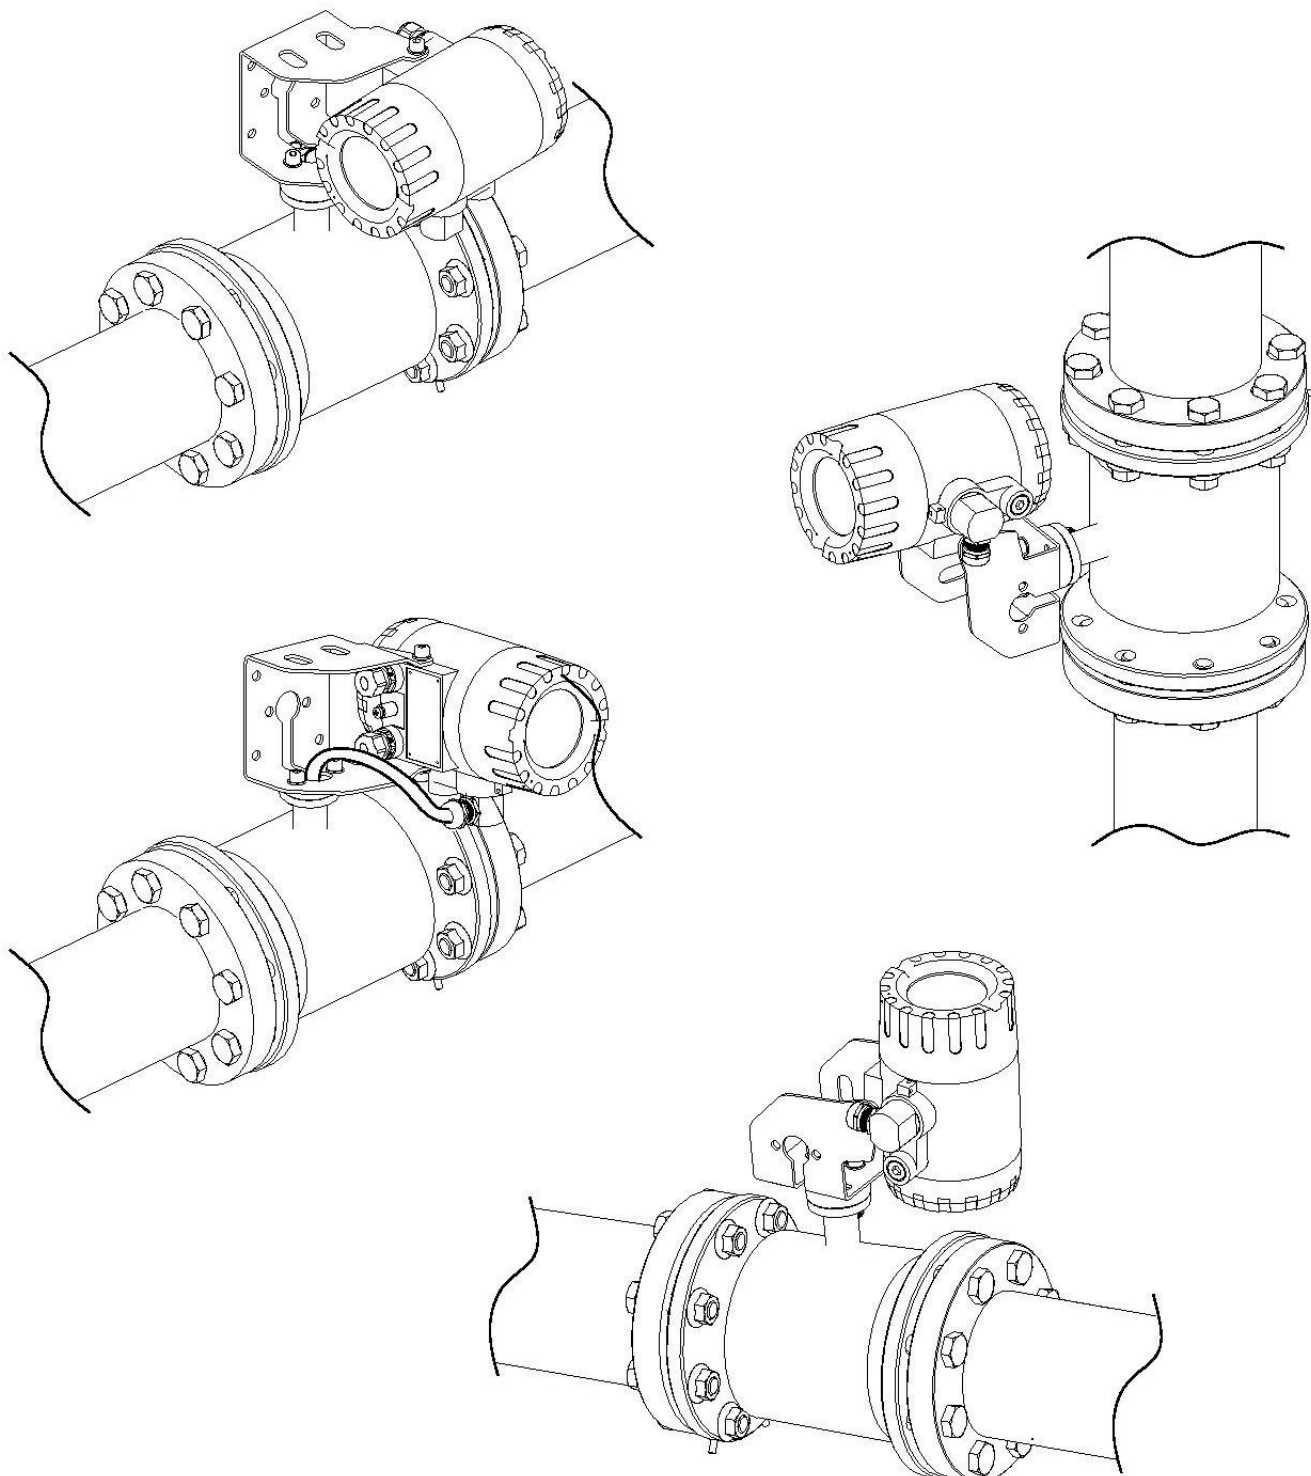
Assembly of the flow meter PEM-1000ALW – examples.
